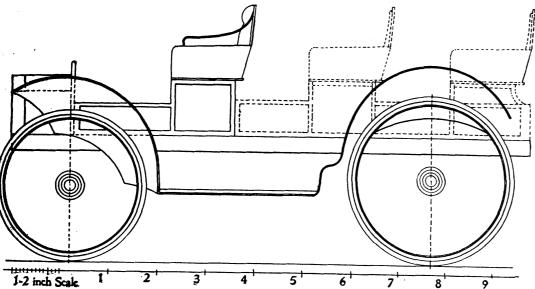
A high wheel solid rubber tired motor car, fitted with a three seat body.
